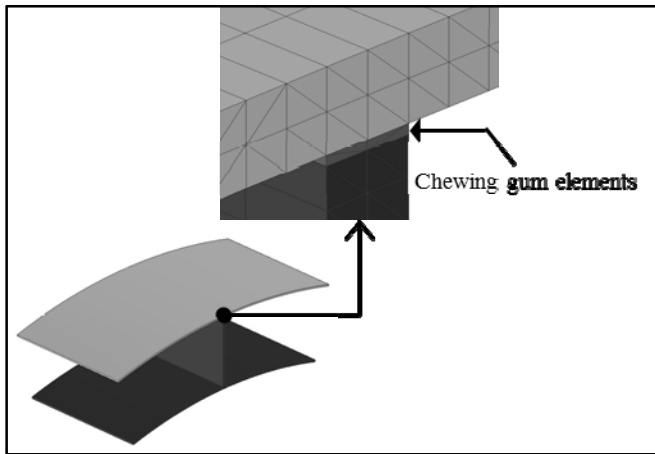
Interfacing welded structure using chewing gum elements to represent fusion.
